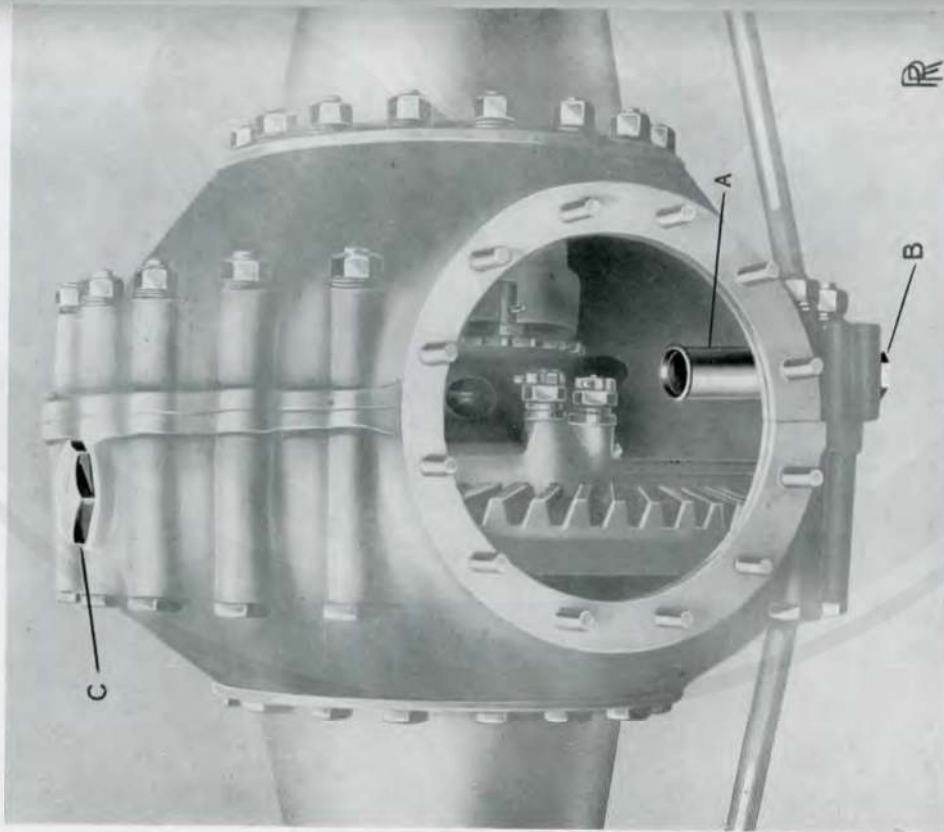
OIL LEVEL PIPE IN BACK AXLE CASING.
